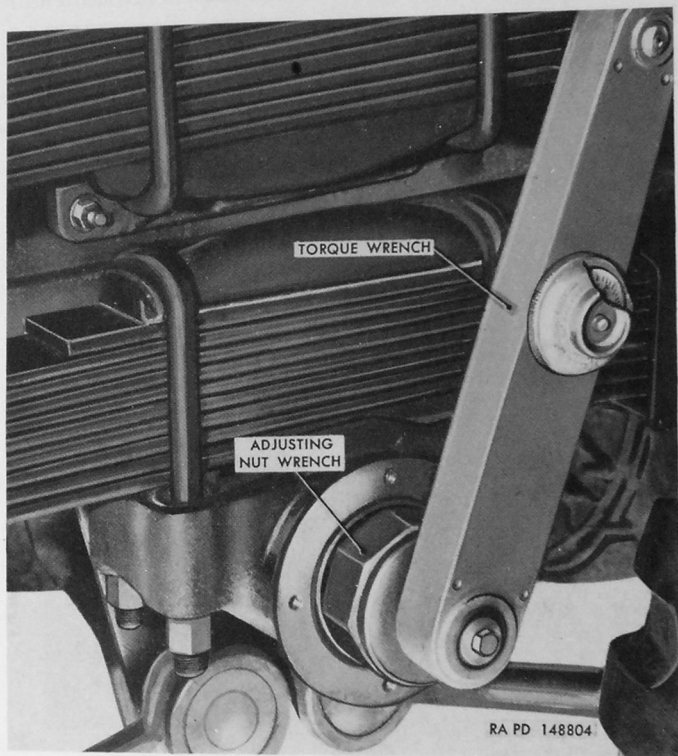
Using wrench 7950946 with torque wrench 41-W-3634 to tighten spring seat adjusting nuts.
